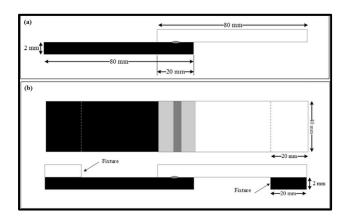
Welded sample (a) Dimensions and arrangement, (b)Fixture for the tensile test sample
